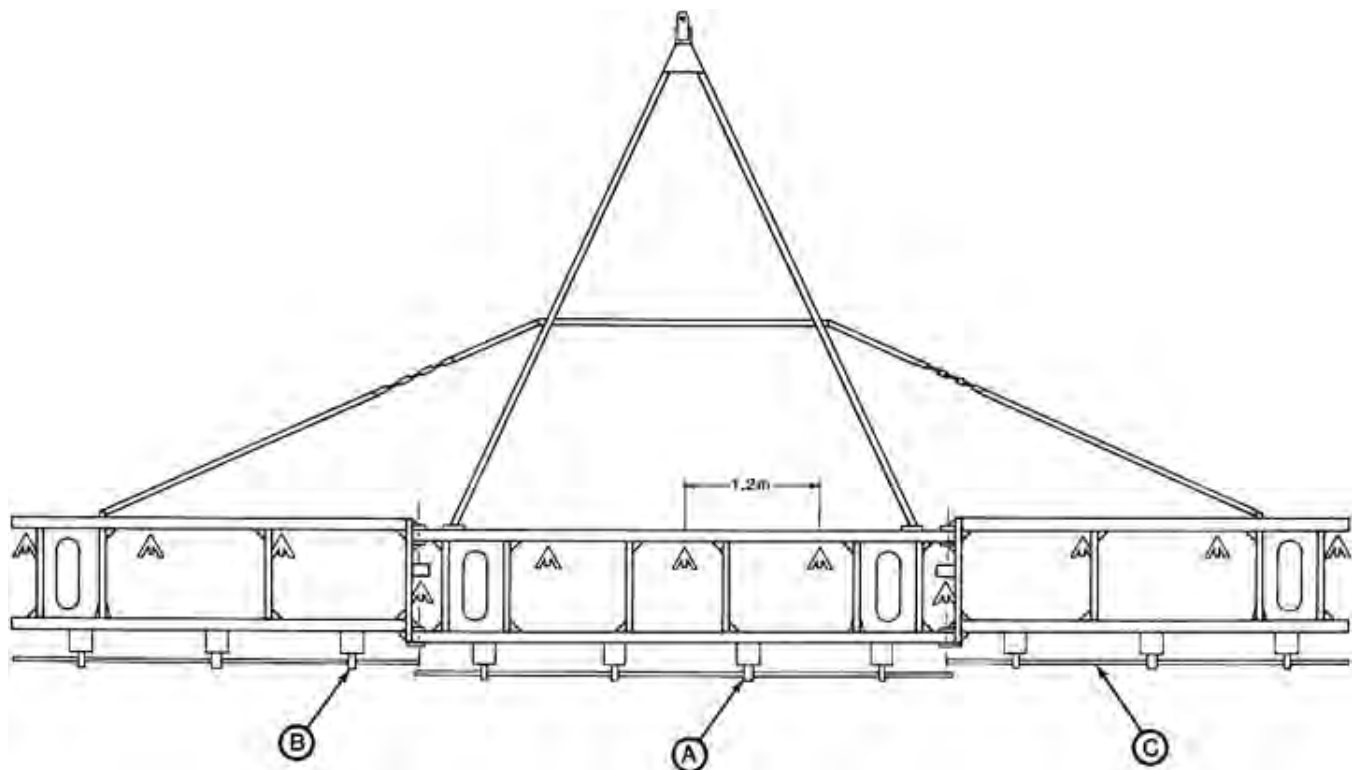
Shank Pattern (A) Rod Drive Shanks, (B) Rod Support Shanks, (C) Rod.
